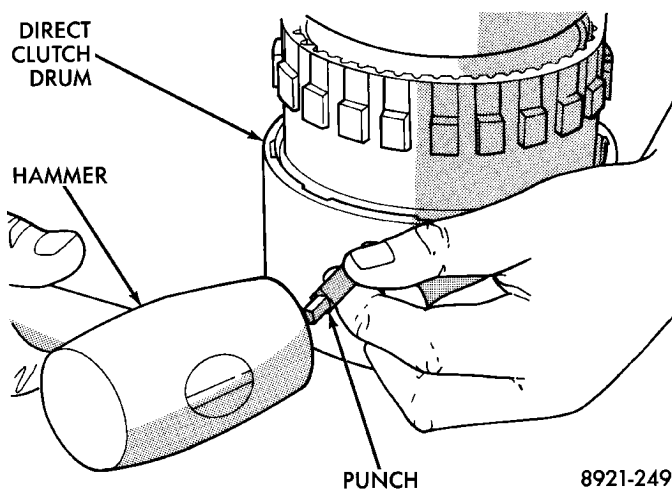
Marking Direct Clutch Drum And Annulus Gear For Assembly Alignment
